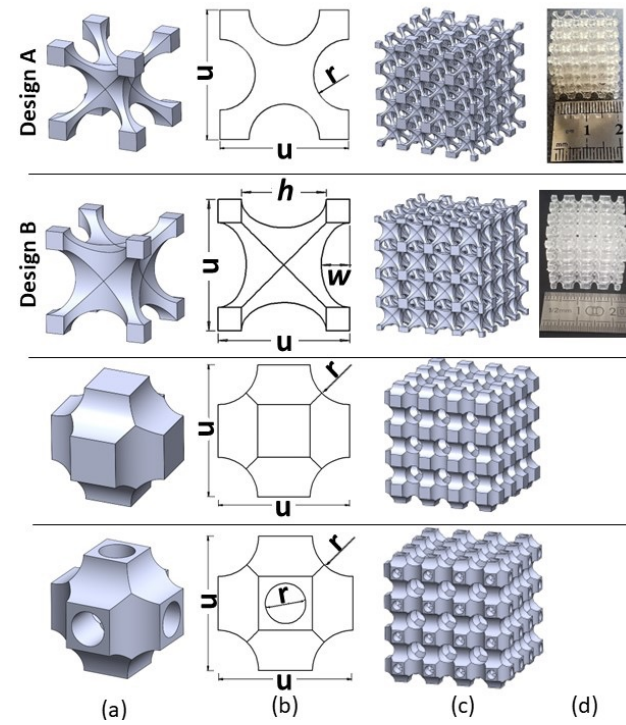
Schematics showing (a) 3D unit designs, (b) cross-sectional view of units, (c) metamaterials formed by stacking 3D cellular units and (d) examples of 3D-printed metamaterials.
